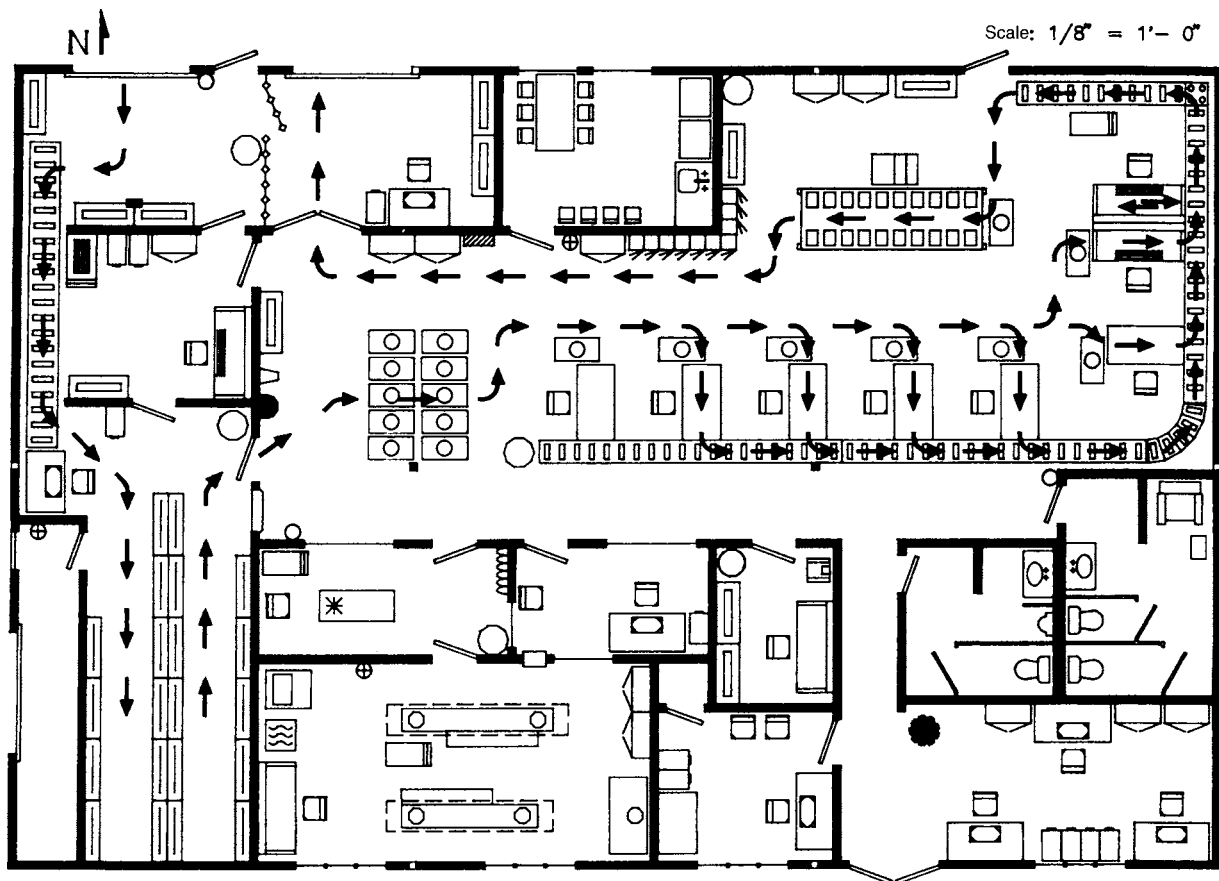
A two-dimensional computer-generated detailed layout of one area of an industrial plant, showing furniture, fixtures, and flow path. (Source: Cederleaf, "Plant Layout and Flow Improvement," McGraw-Hill.)
